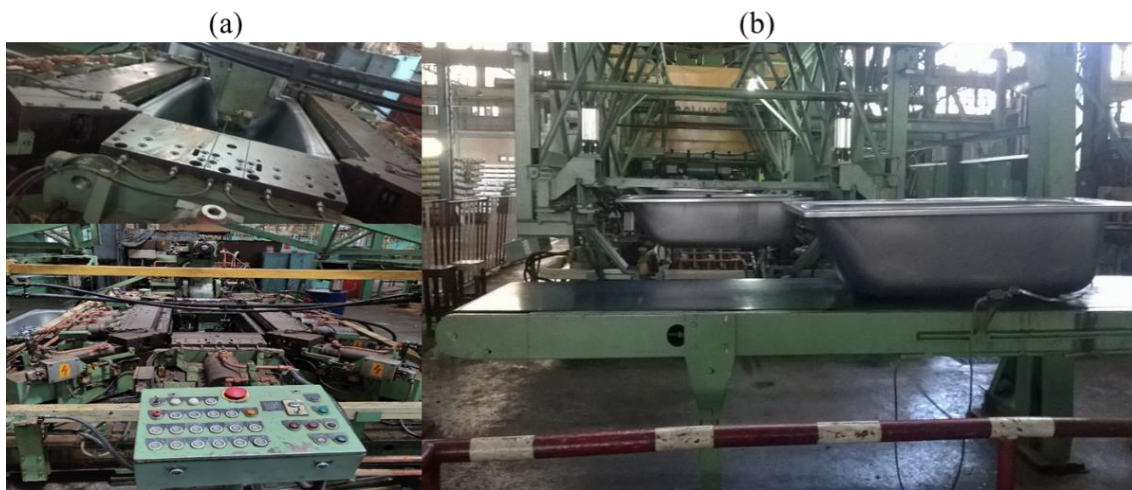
(a) Edge folding machine, (b) Conveyor belt.
